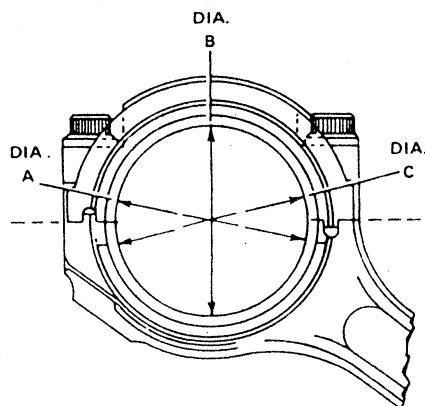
Measure inner diameter of connecting rod bore (without bearing insert) at locations shown. Renew connecting rod if bore is out-of-round in excess of 0.001 inch (0.025 mm).
